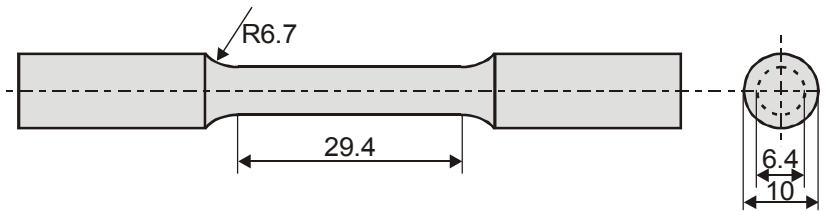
Dimension of the test specimen for the standard tensile test^[GEN 35].
